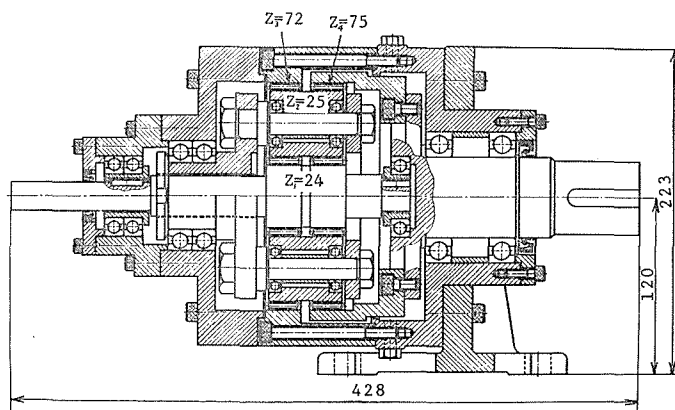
Assembly Drawing of 3K Type Planetary Gear built as a Trial
